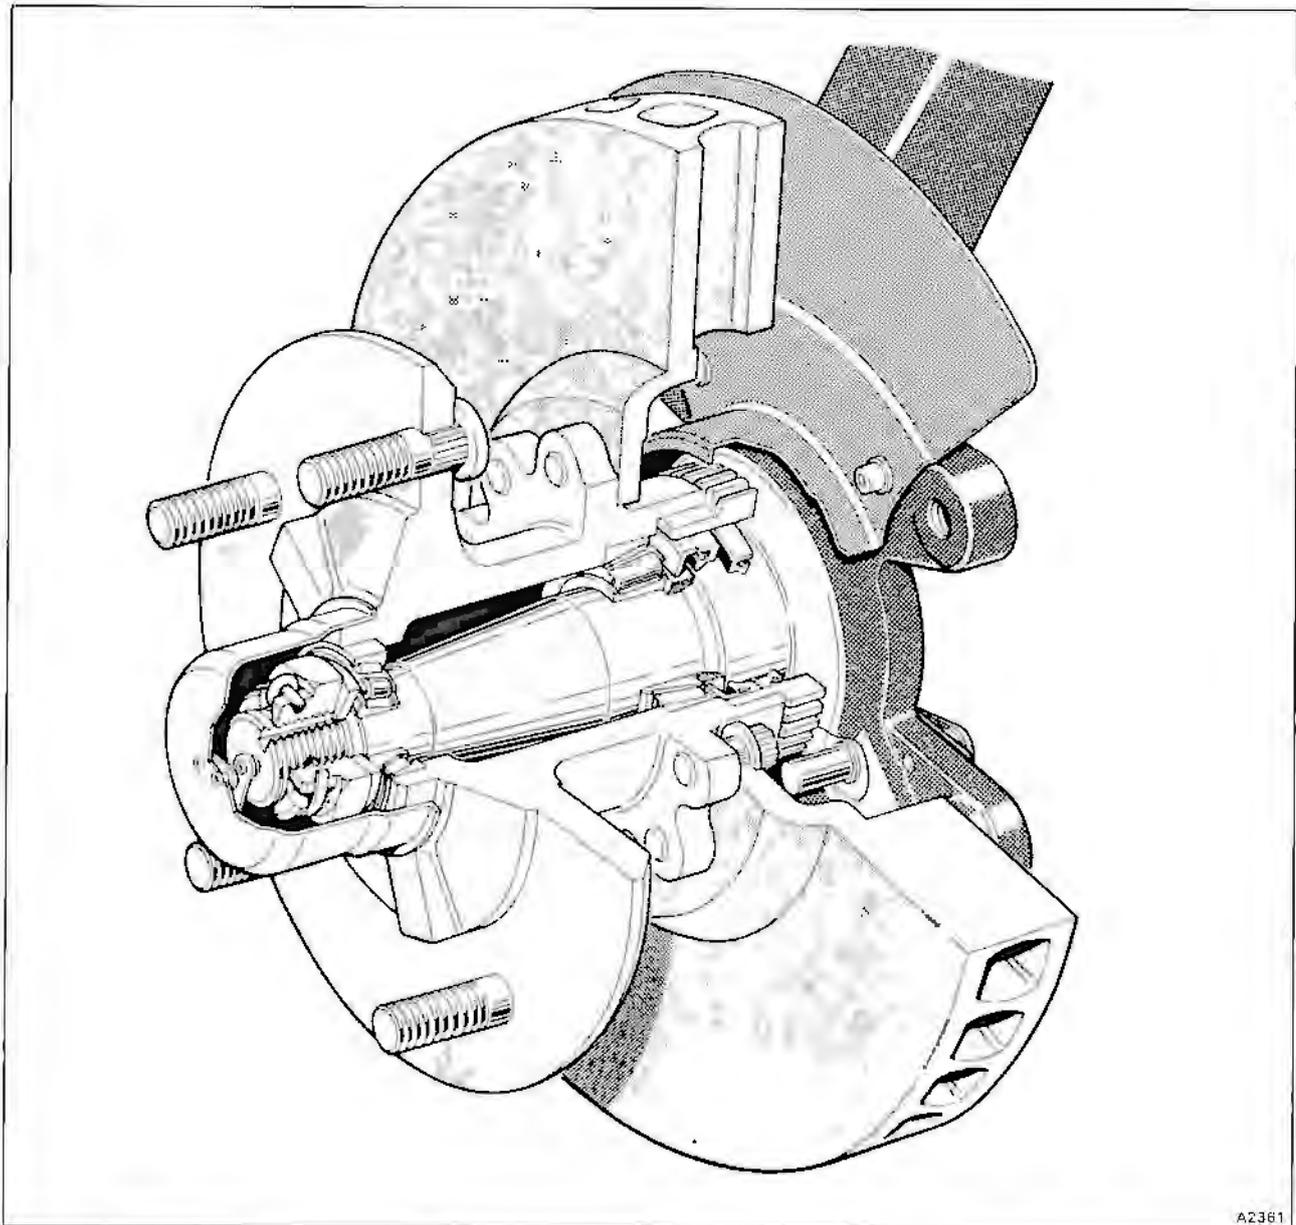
Front hub assembly (Cars fitted with anti-lock braking)
